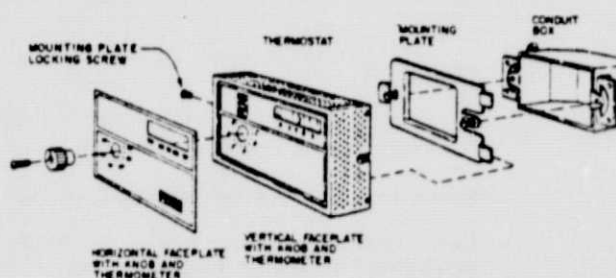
Line drawing illustrating method of mounting a vertical thermostat to a horizontal outlet box and installing a horizontal faceplate.
